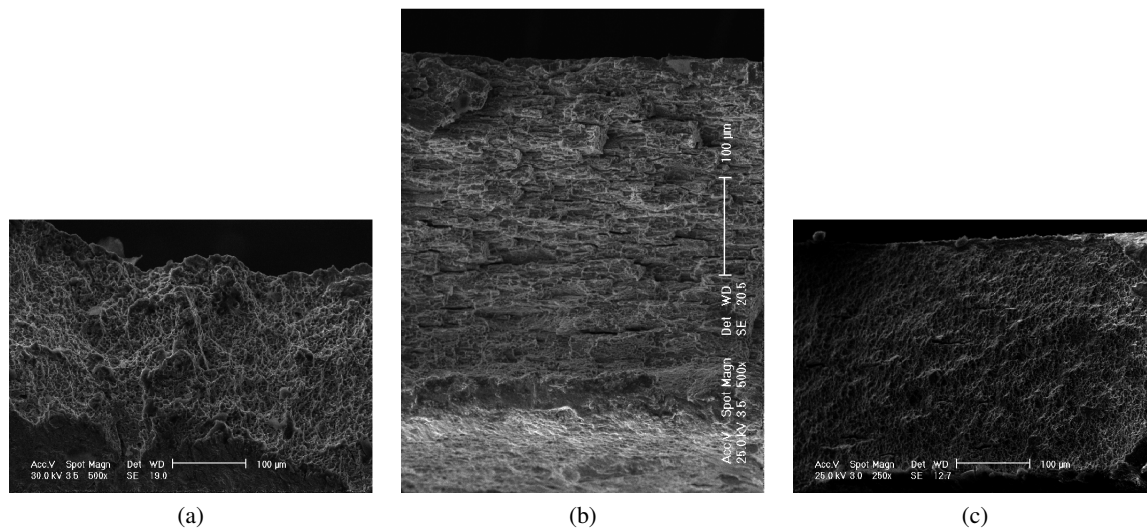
The SEM fractographs showing radial-axial plane for (a) as fabricated clad material, (b) failed low burnup fuel pin and (c) high burnup fuel clad.
